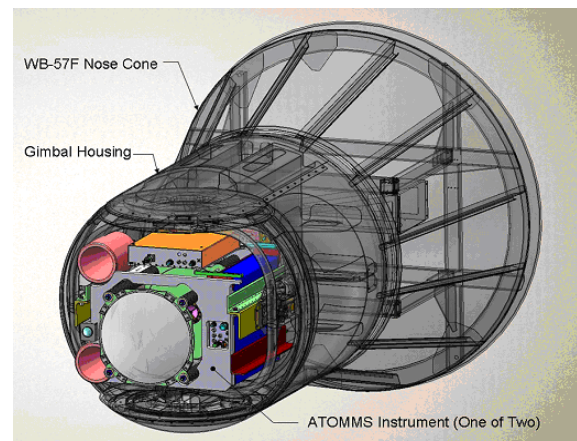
A 3D CAD model of one of the ATOMMS instruments in the SRI WAVE gimbal. The ATOMMS instrument was completely built in CAD before any fabrication took place.
